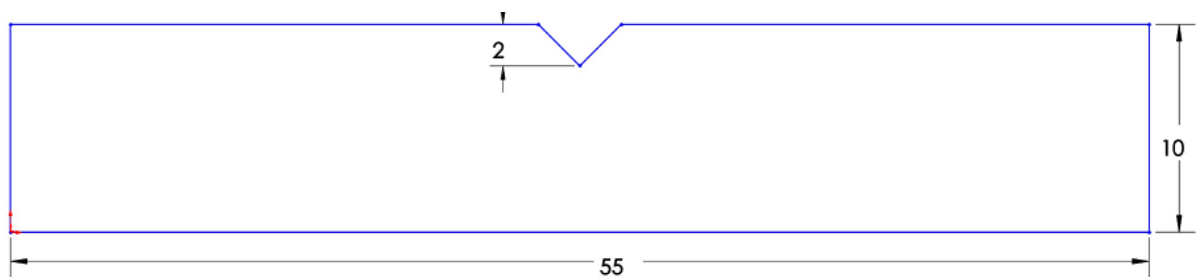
24 Impact test specimen dimension [ISO 9001:2001, 2010]
